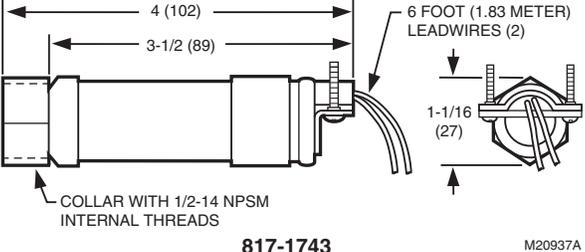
Ultraviolet detector, mounting dimensions in inches (mm).
